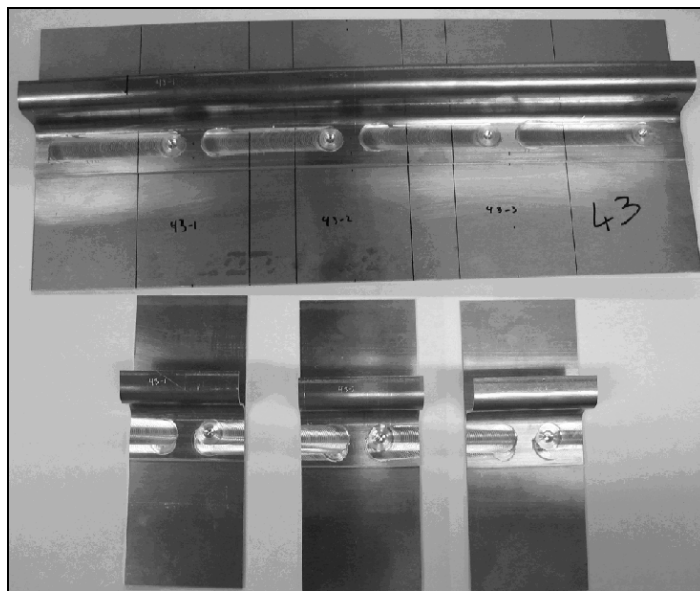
Specimens cut from original welded panel (Courtesy NRC-IAR (Ottawa))
